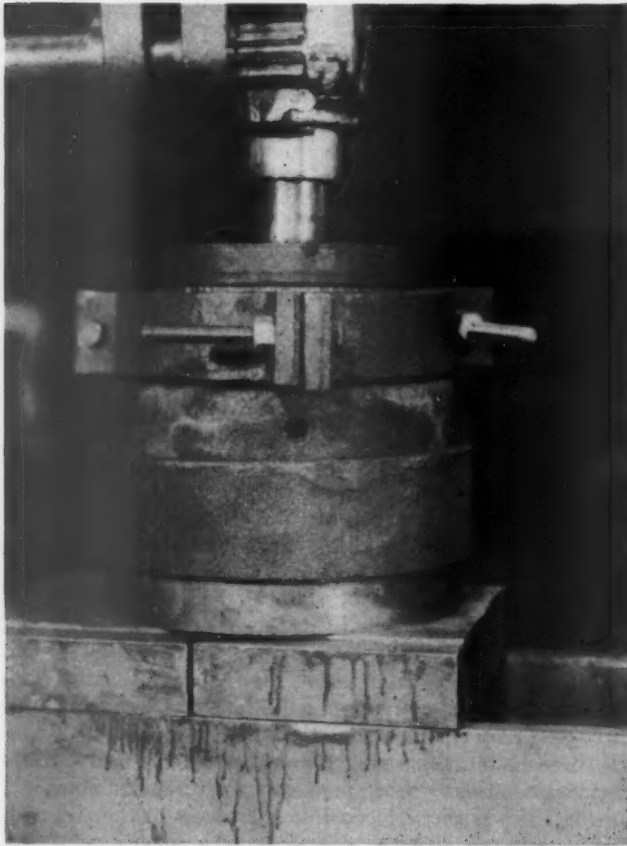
The springs have been compressed by the three-part ring at the top and are being pushed down into a wheel rim which rests in a recess in the jig at the bottom
